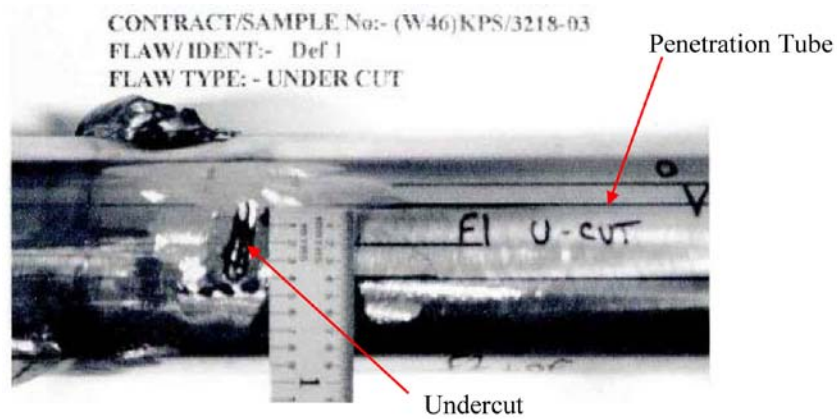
Example Weld Undercut Flaw as Used in Test Blocks 5.1–5.3
